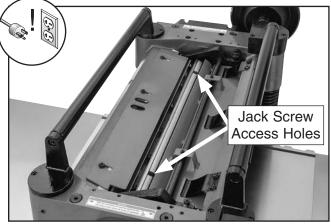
G0453W & G0454W jack screw access hole in cutterhead.
